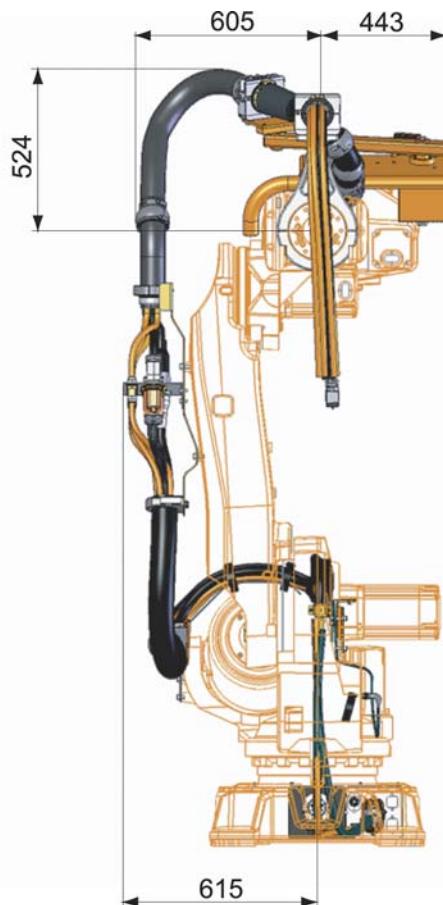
External with retract arm, 781-1 (Dimensions in mm).
